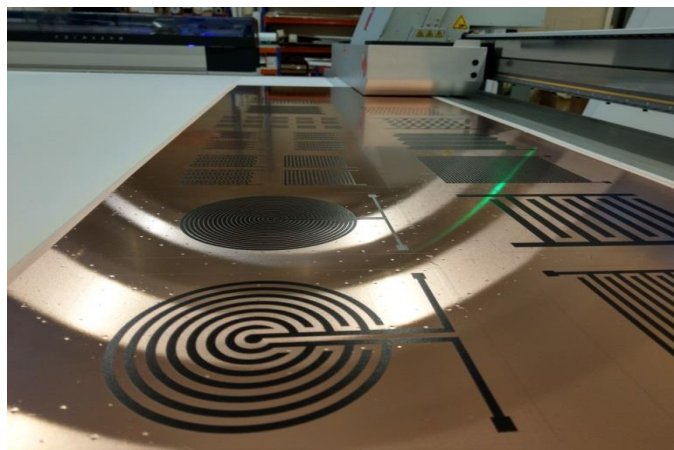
Printing photo-mask on flexible copper-clad laminate using the UV flatbed
